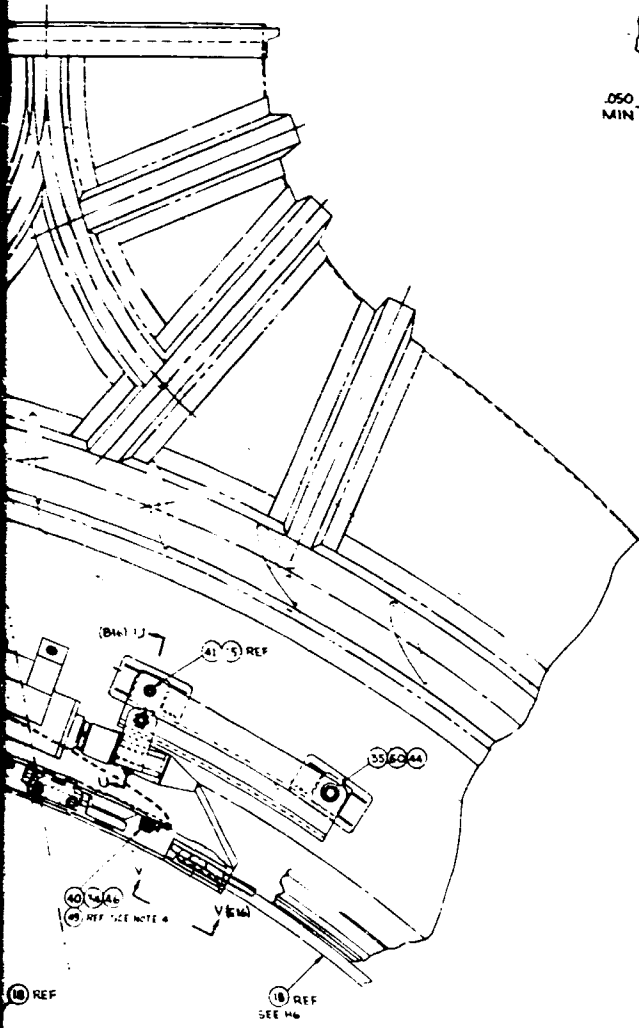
Variable Area Scroll Assembly (Drawing 4013007-450, Sheet 1).
